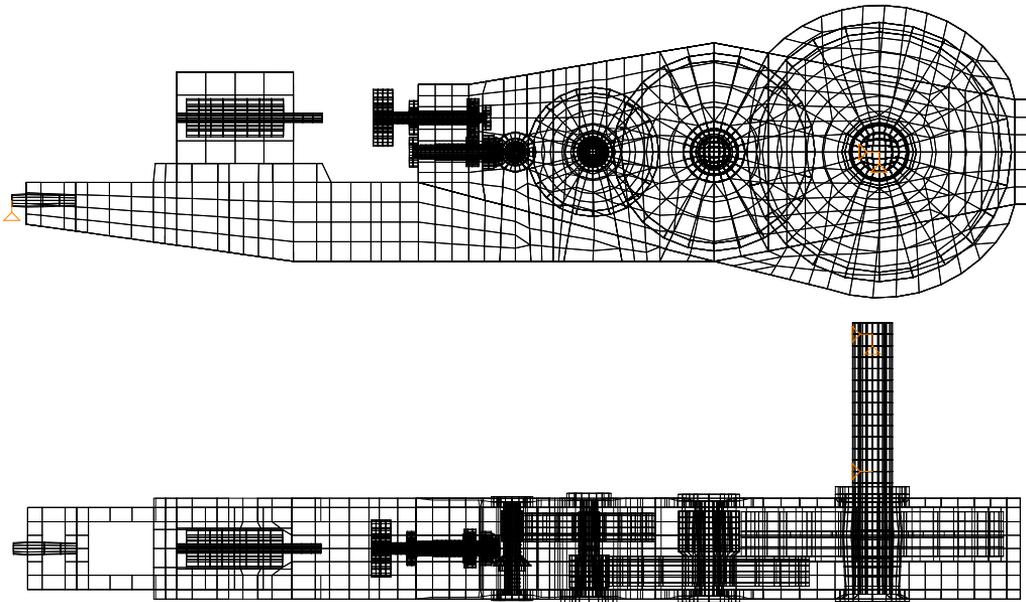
Gearbox model and bucket wheel drive support structure at the excavator SRs470.17/1.5(400kW)
